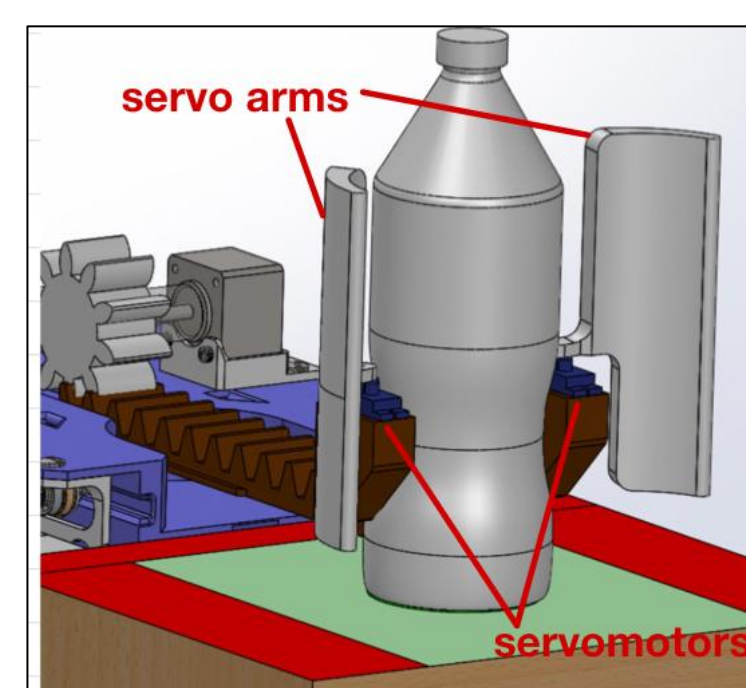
Tall 3D printed servo arms that will hug the bottle to prevent the bottle from tipping over, and open to release the bottle.
